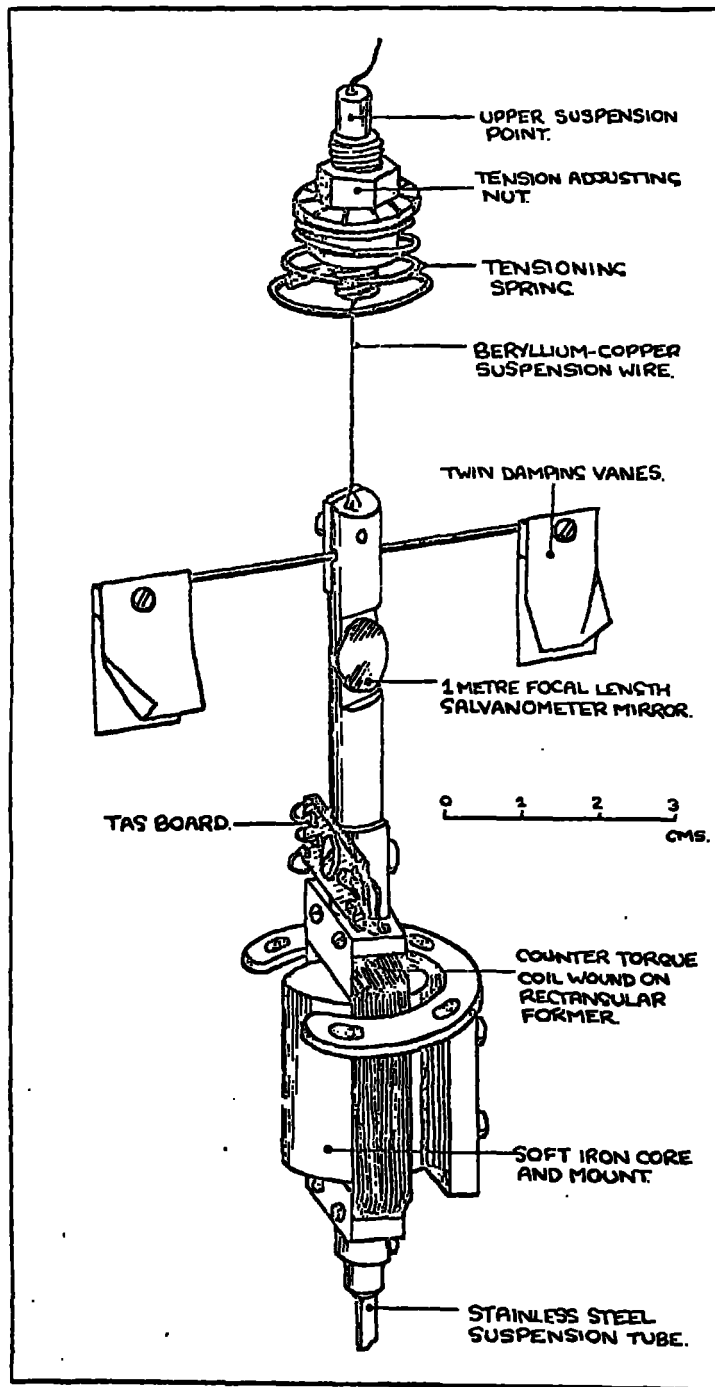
Upper suspension and coil assembly of the torque magnetometer.
